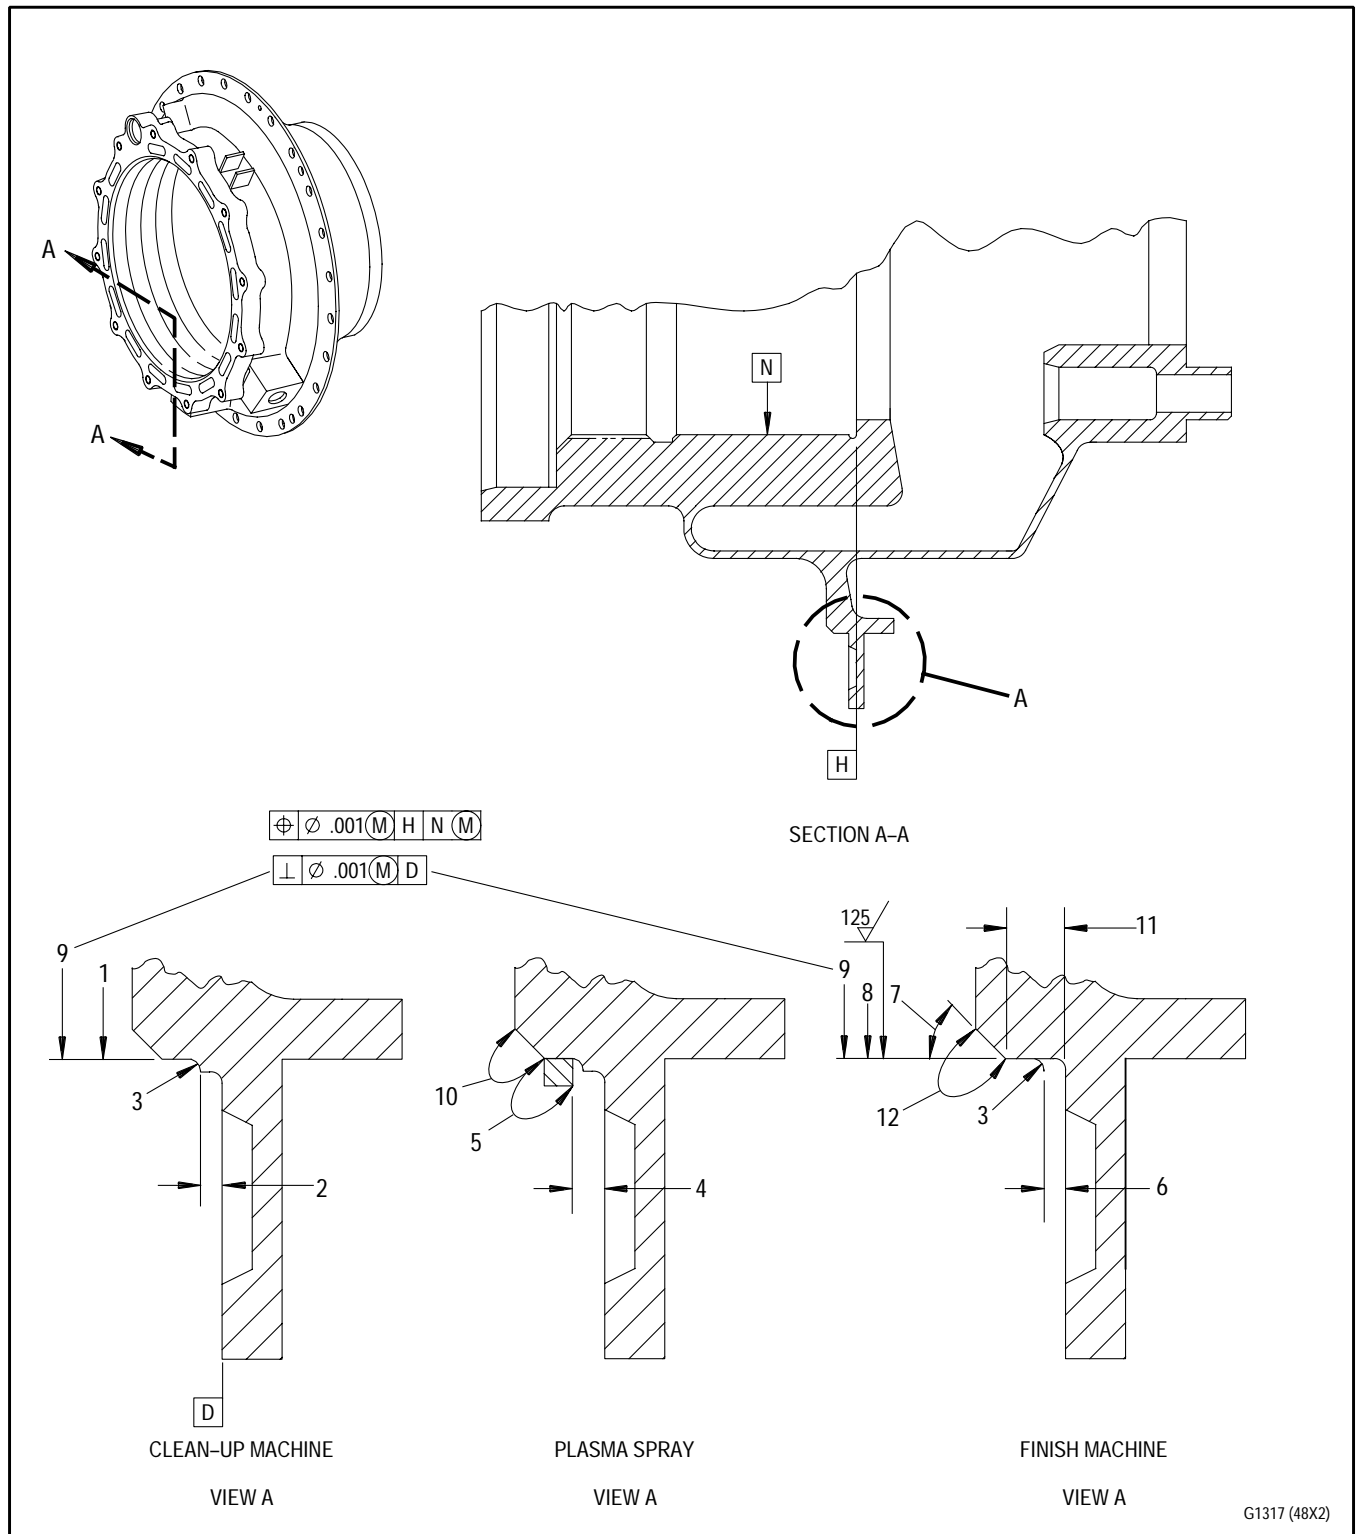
No. 1 Bearing Housing Assembly - Outer Snap Diameter Repair
